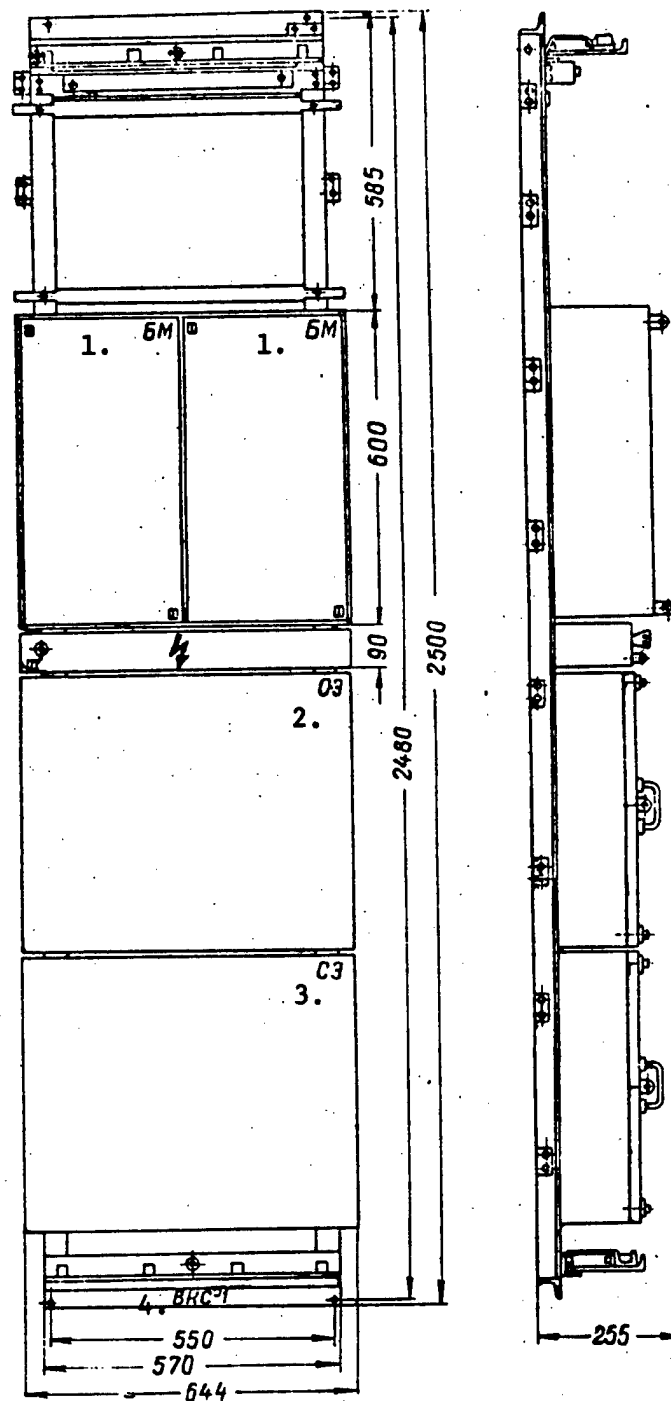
The placement of the equipment components in the VKS-1 7 x 4 NUP cable input rack.
